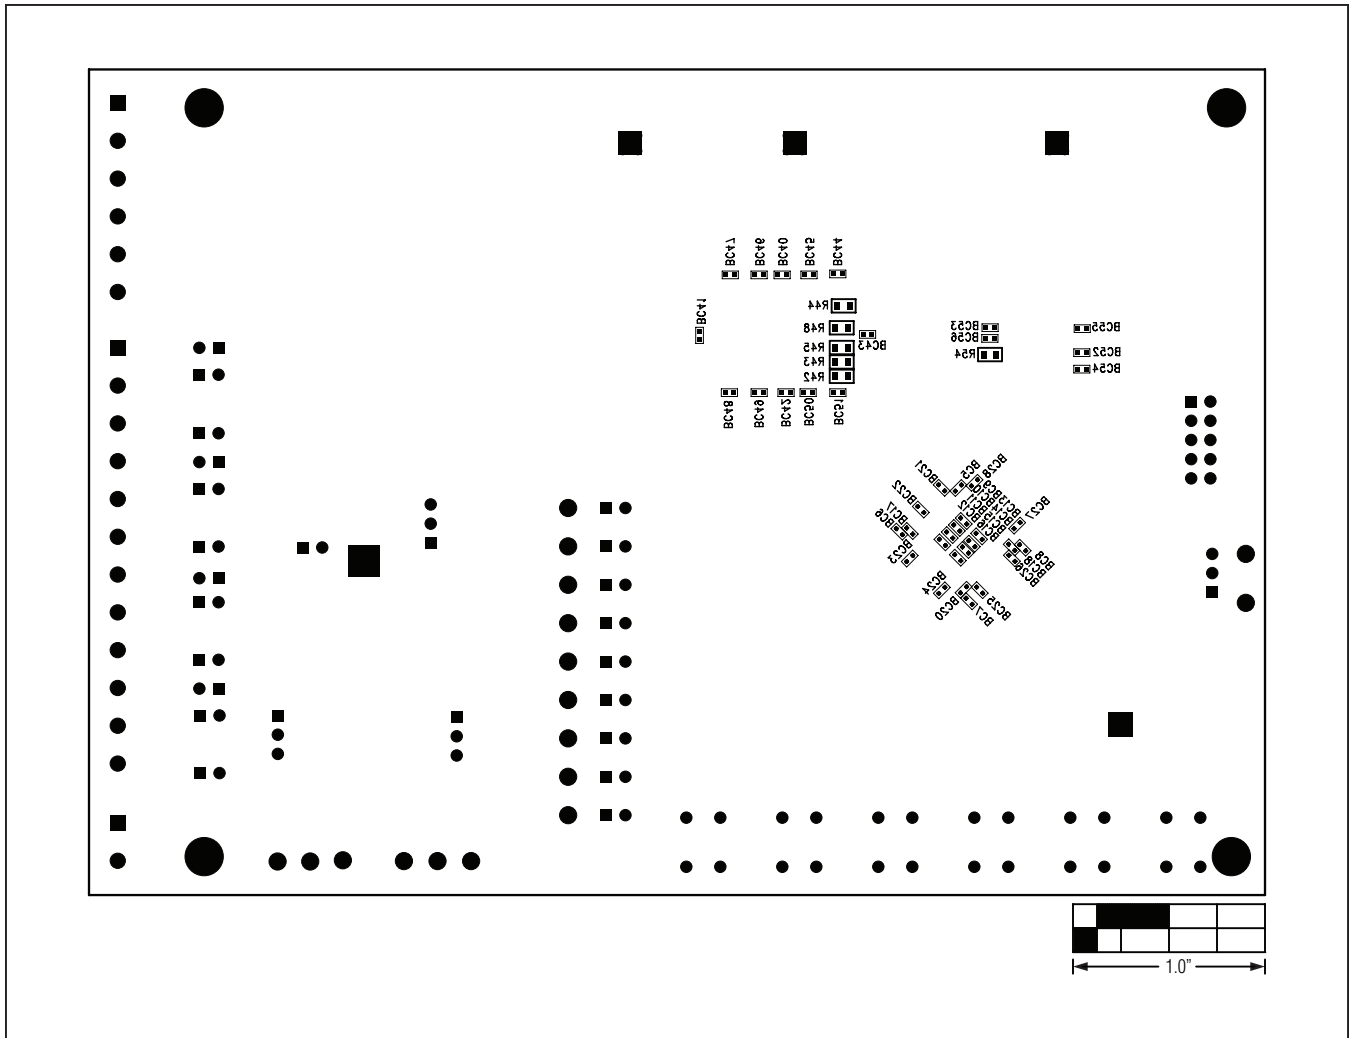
MAX11043 EV Kit Component Placement Guide—Solder Side
